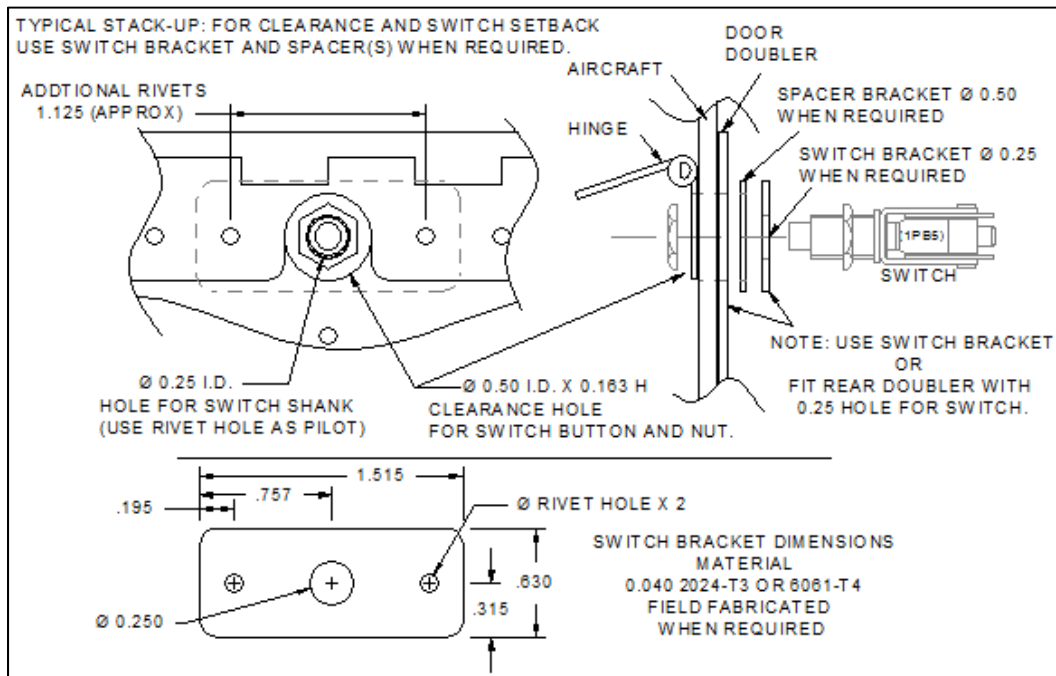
Example of stack-up: Before cutting holes check switch clearance and setback. Typical installation uses center hinge rivet hole for pilot adding two rivets one each side of switch. Bracket and/or spacer(s) used as required. Note: clearance hole dimensions for switch button and adjustment nut. Typical composite panel installation does not require bracket, switch located with 0.25-inch hole in rear door doubler.
